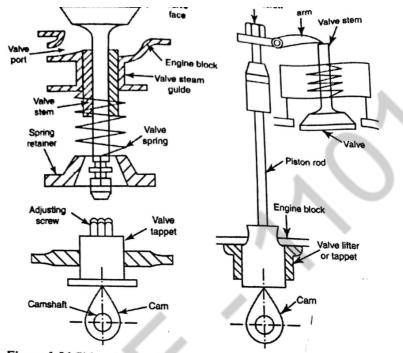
Side valve mechanism Figure 1.57 Overhead valve mechanism
